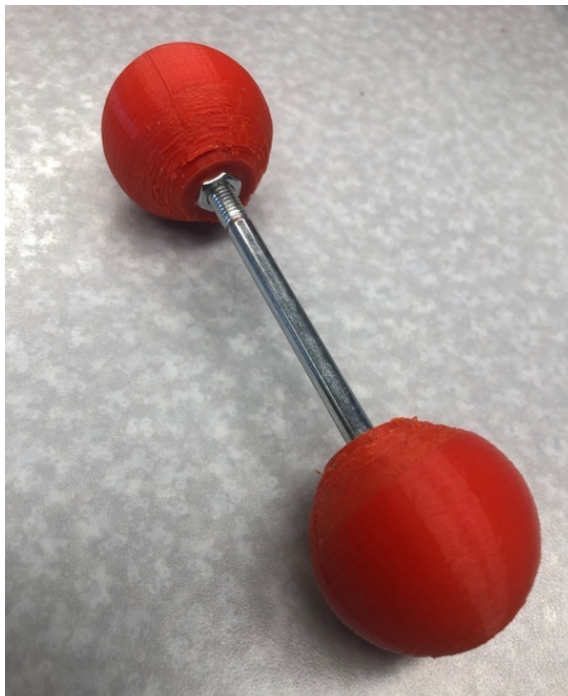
This screw and nut mechanism was assembled by heat-setting the nut and bolt into the plastic sphere.
